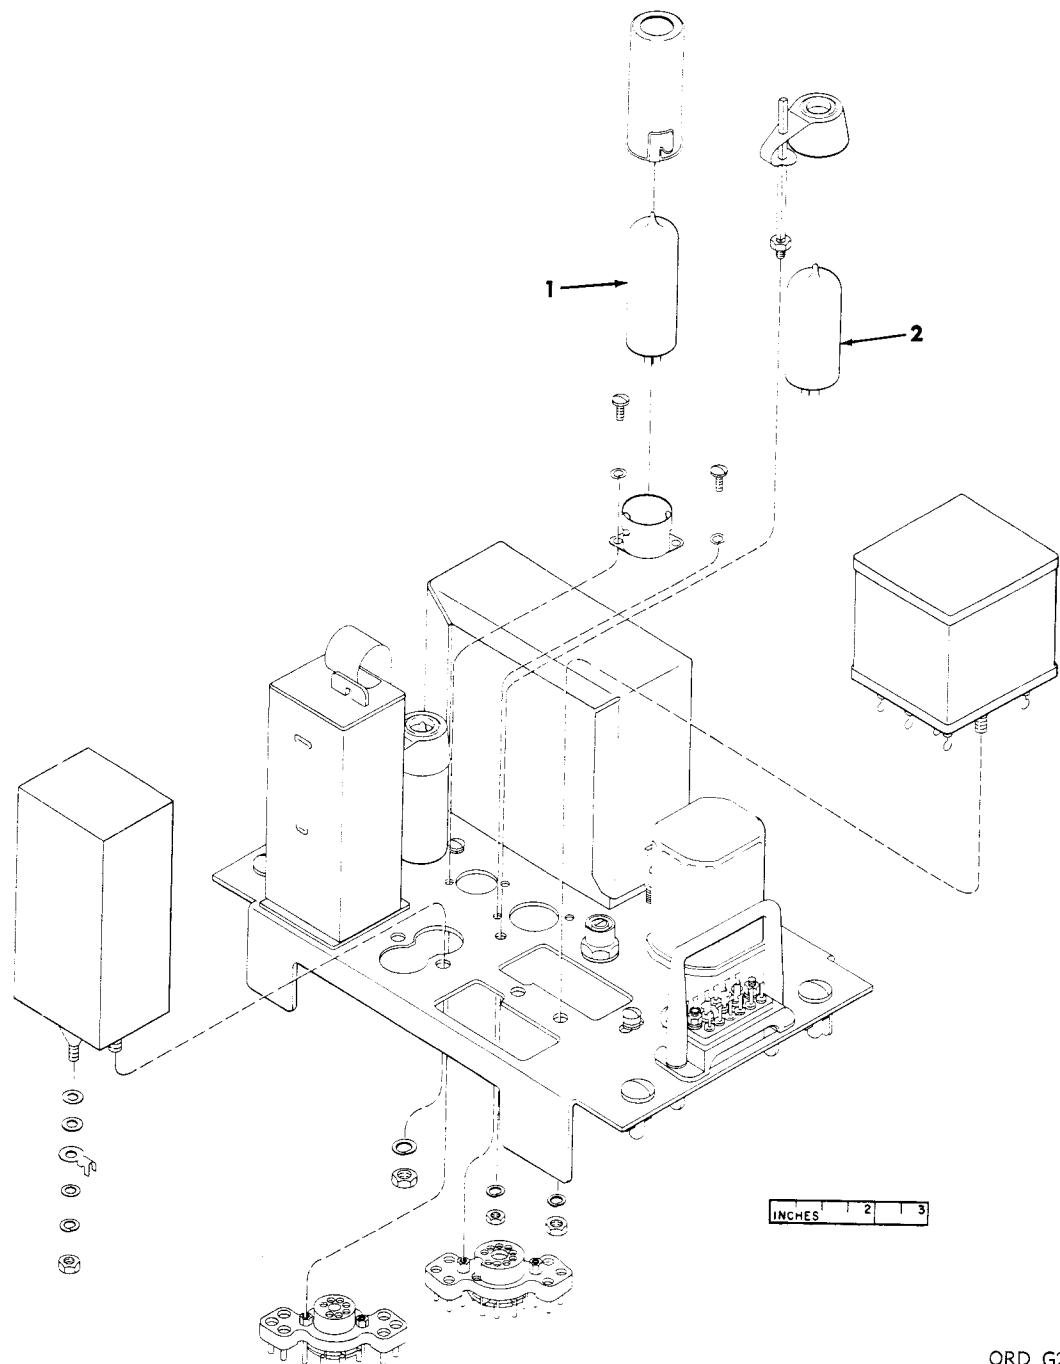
Regulator, voltage CN-281/M (7620552) – partial exploded view
